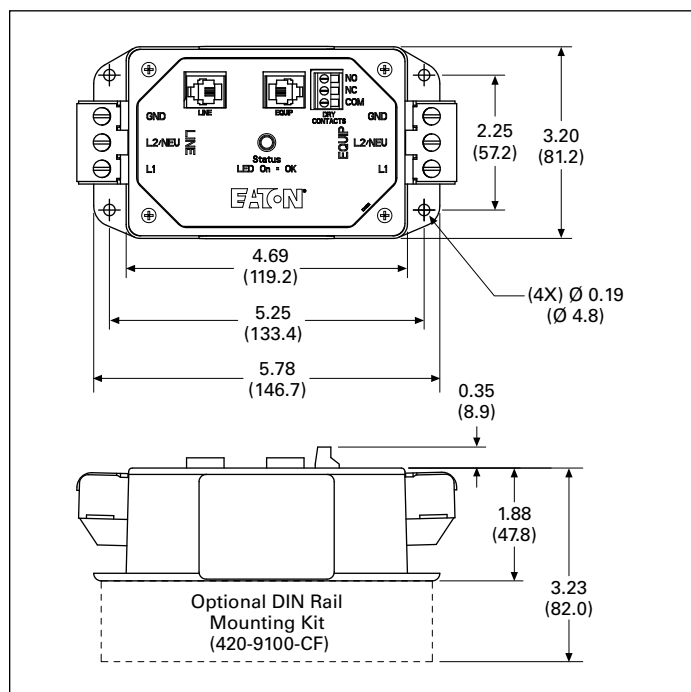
AGCFxxx30xxx Dimensions in Inches (mm)
